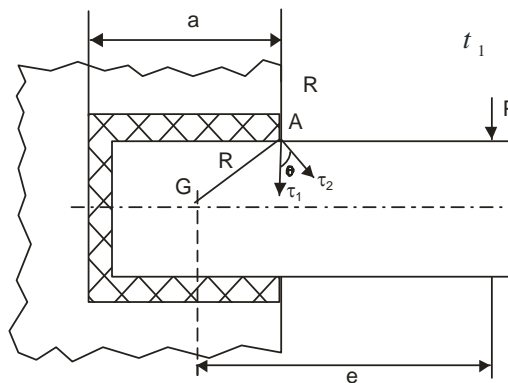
Welded Joint Loaded Eccentrically
